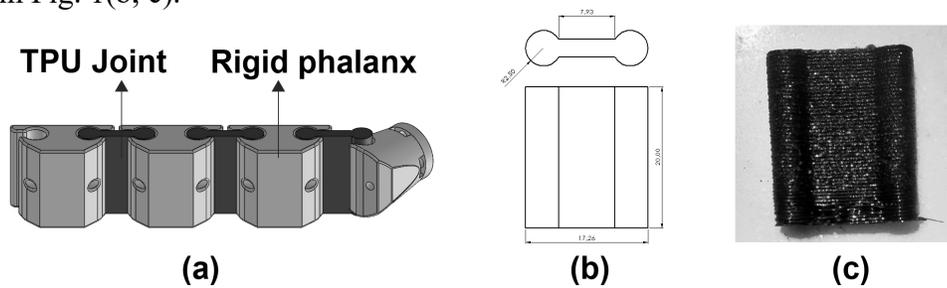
Modular finger: (a) assembly; (b) joint dimensions; (c) 3D printed joint
